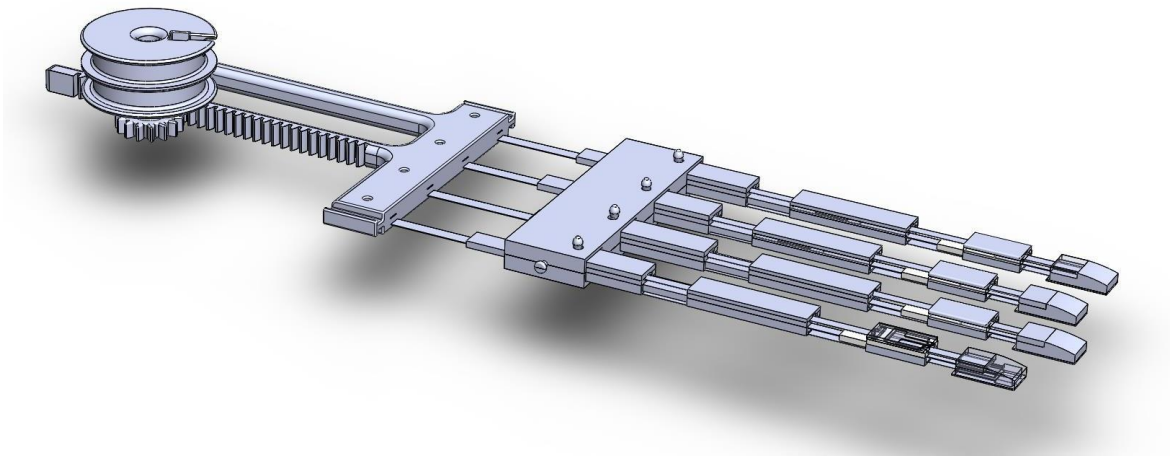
Final CAD Model: mechanisms without housing and casings (Isometric View)
